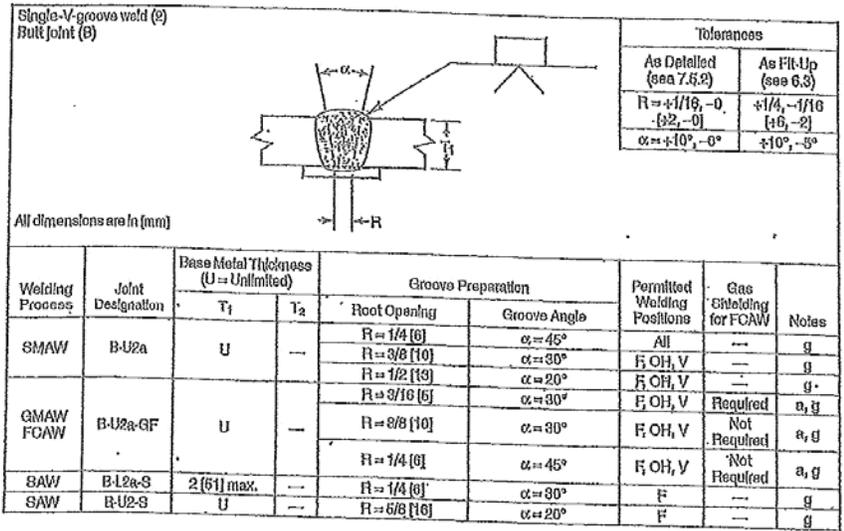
B—Prequalified Complete Joint Penetration (CJP) Groove Welded Joint Details
